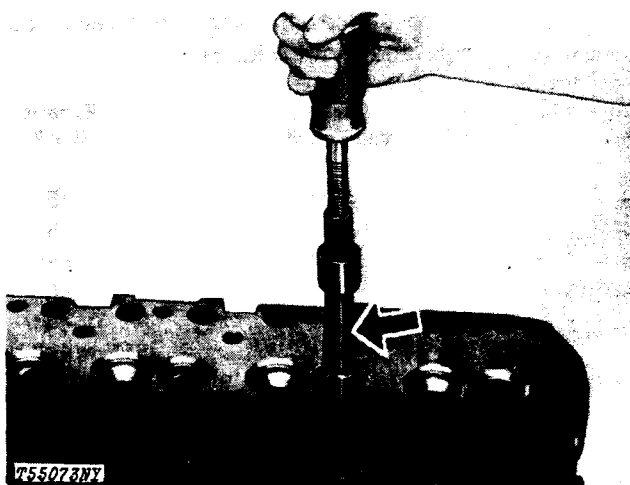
JDE-77 or JDE-87 Valve Seat Puller
